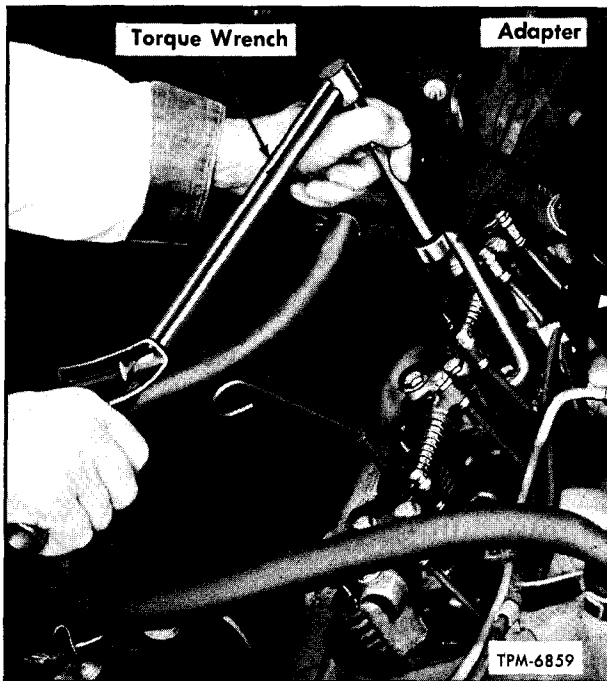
Use of Torque Wrench and Adapter to Tighten Cylinder Head Bolts
